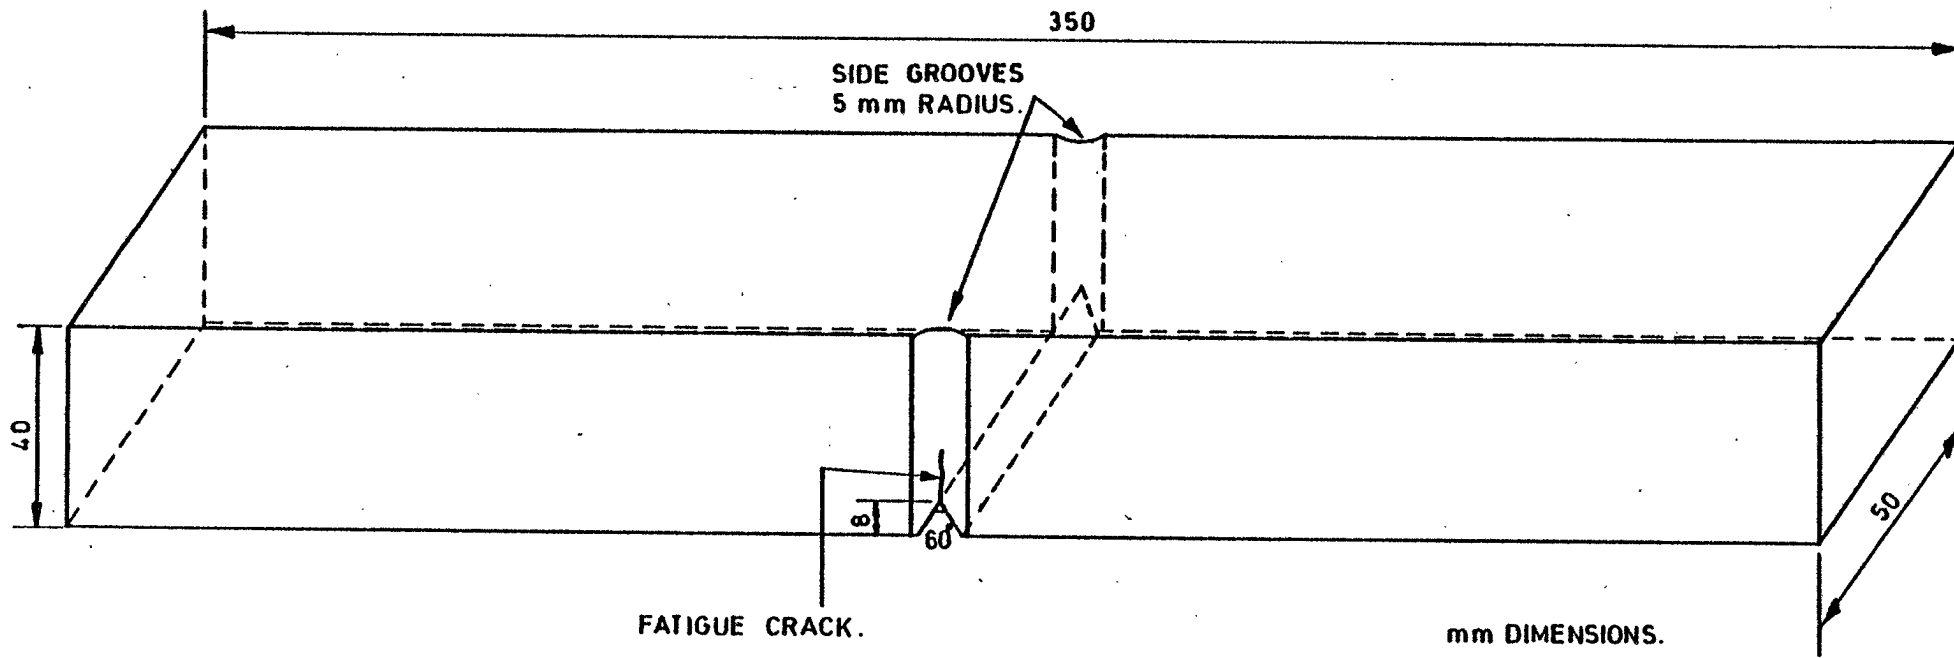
(a). INITIAL FATIGUE CRACK SPECIMEN.
